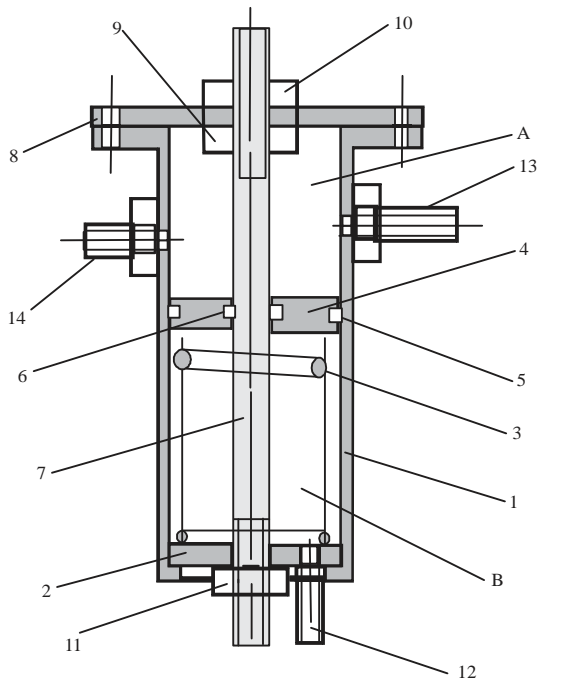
Heat exchanger with variable surface area (1) Heat exchanger housing, (2) Stop plate, (3) Spring, (4) Piston, (5) An external sealing ring, (6) An internal sealing ring, (7) Heating tube, (8) Cover, (9) Hard nut, (10) Nut, (11) Adjusting nut, (12) Drain fitting, (13) Exhaust fitting and (14) Inlet fitting, A: the cavity of the fuel heating, B: adjusting cavity
